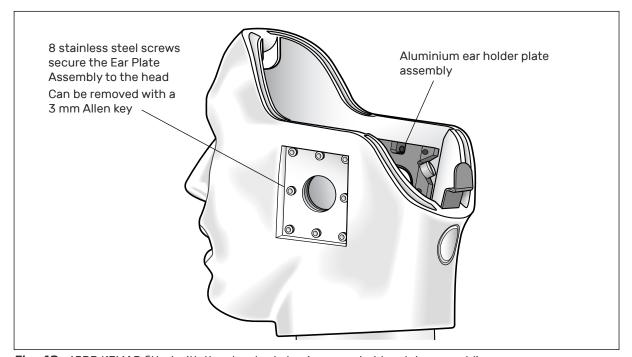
45BB KEMAR fitted with the standard aluminum ear holder plate assemblies.
